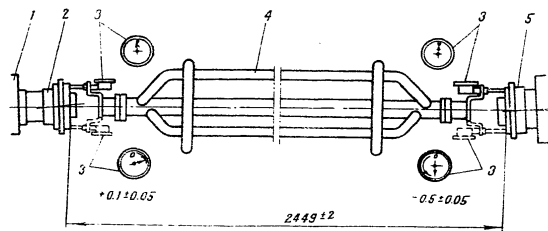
CHECKING ENGINE AND MAIN GEAR BOX FOR AXIAL ALIGNMENT
